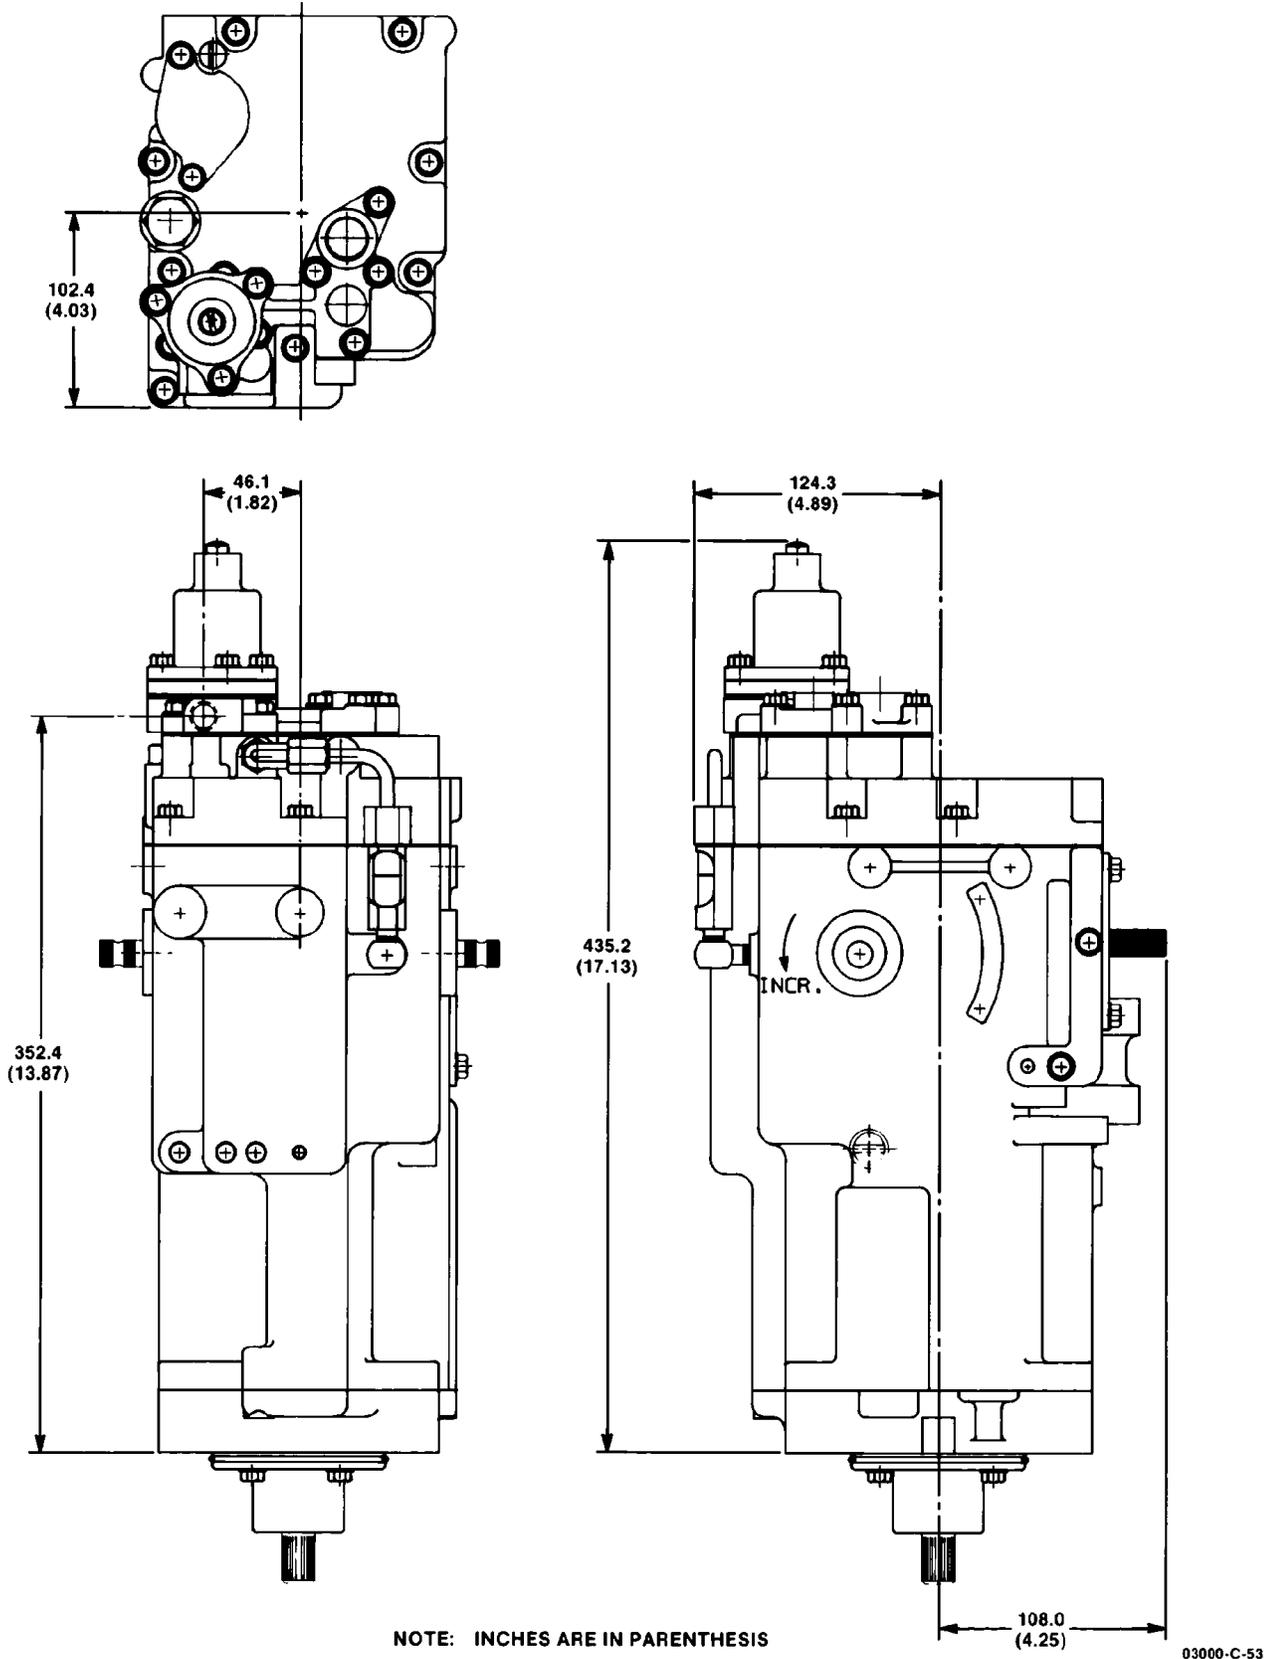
Outline Drawing of 3161 Governor with Air Pressure Fuel Limiter
